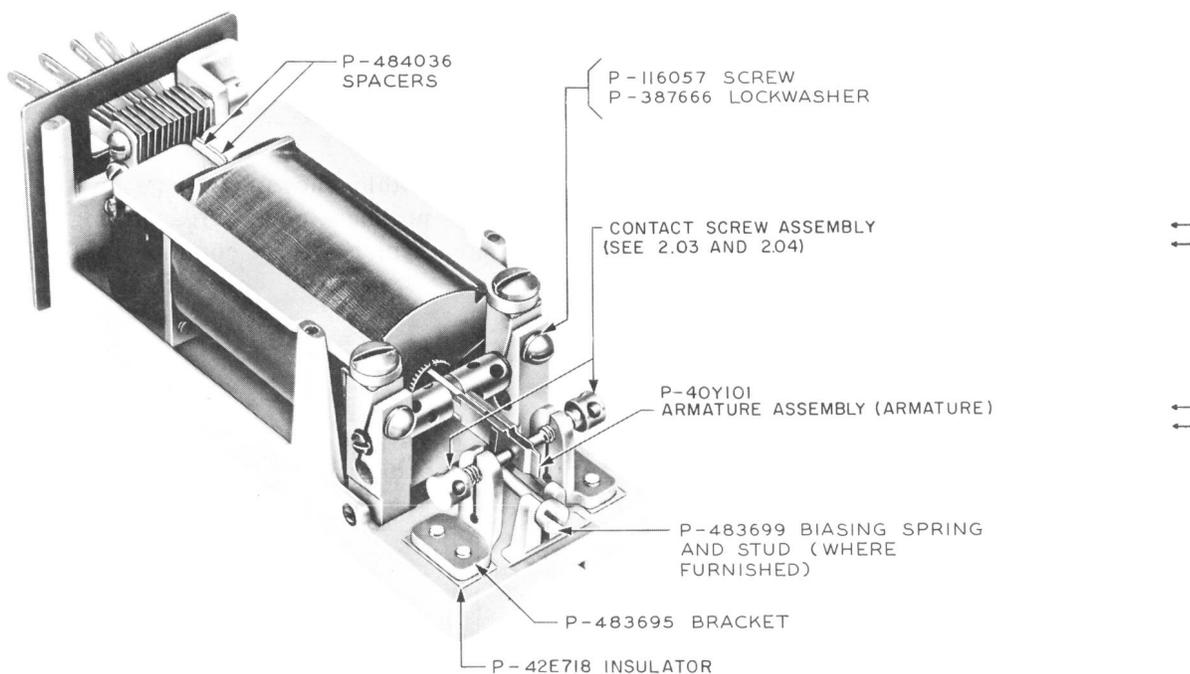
280-Type Relay - General View With Shell and Cover Cap Removed
